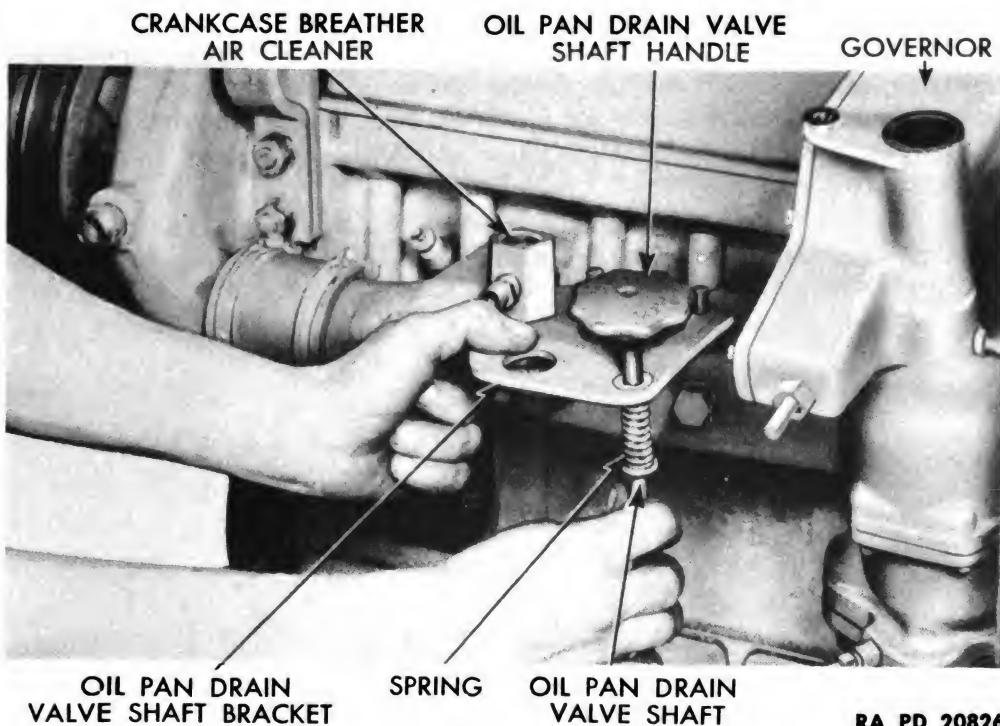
Removing and Installing Oil Drain Valve Shaft and Bracket
